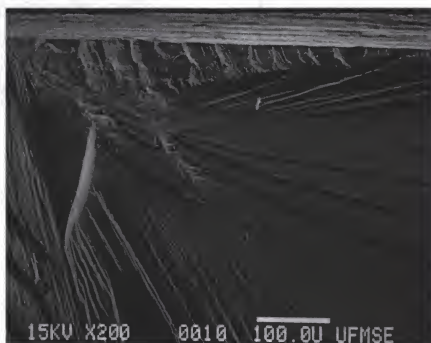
(a) Fracture surface of the specimen corresponding to the crack profile showing Figure 4.35. Figure 4.36 (b) A high magnification view of the fractograph shown in Figure 4.36 (a).
